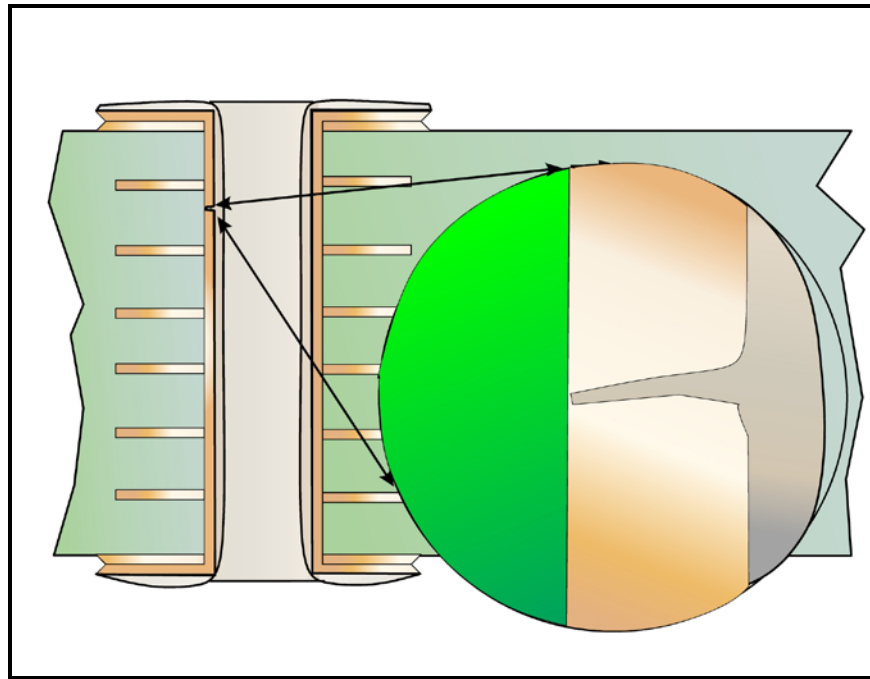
Barrel Crack with Solder and Copper Dissolution
